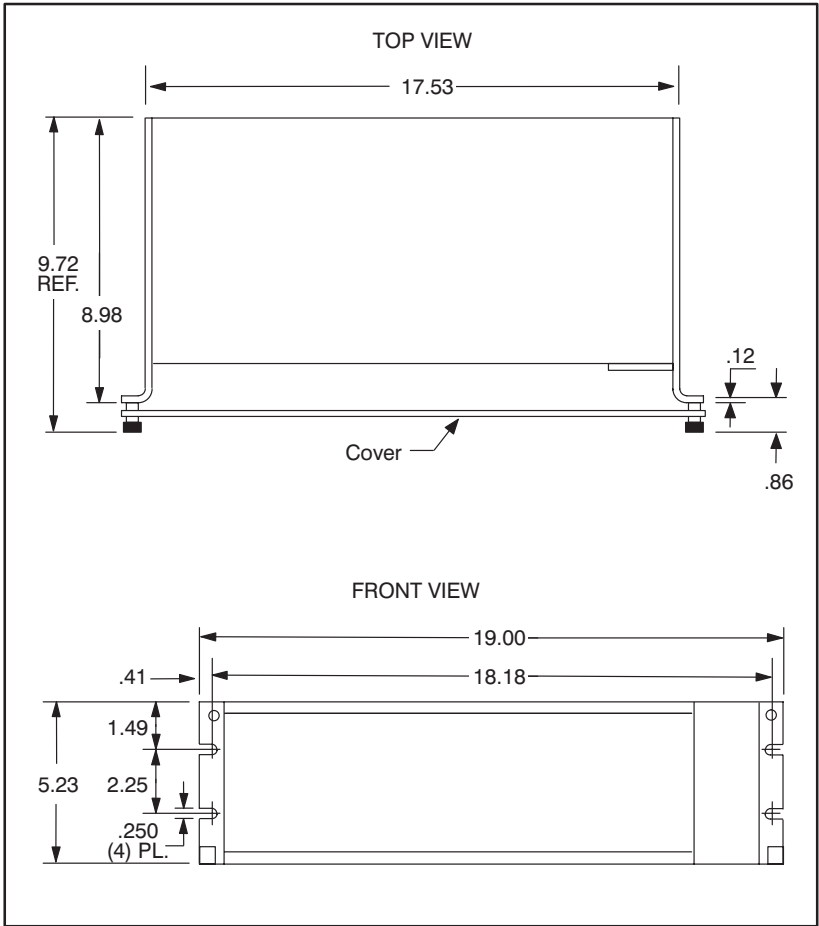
Fiber-Optic Rack Mounting Dimensions
